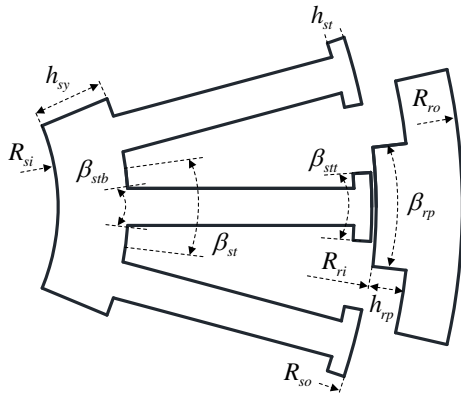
Design dimensional parameters of the proposed OR-FSDC machine.
